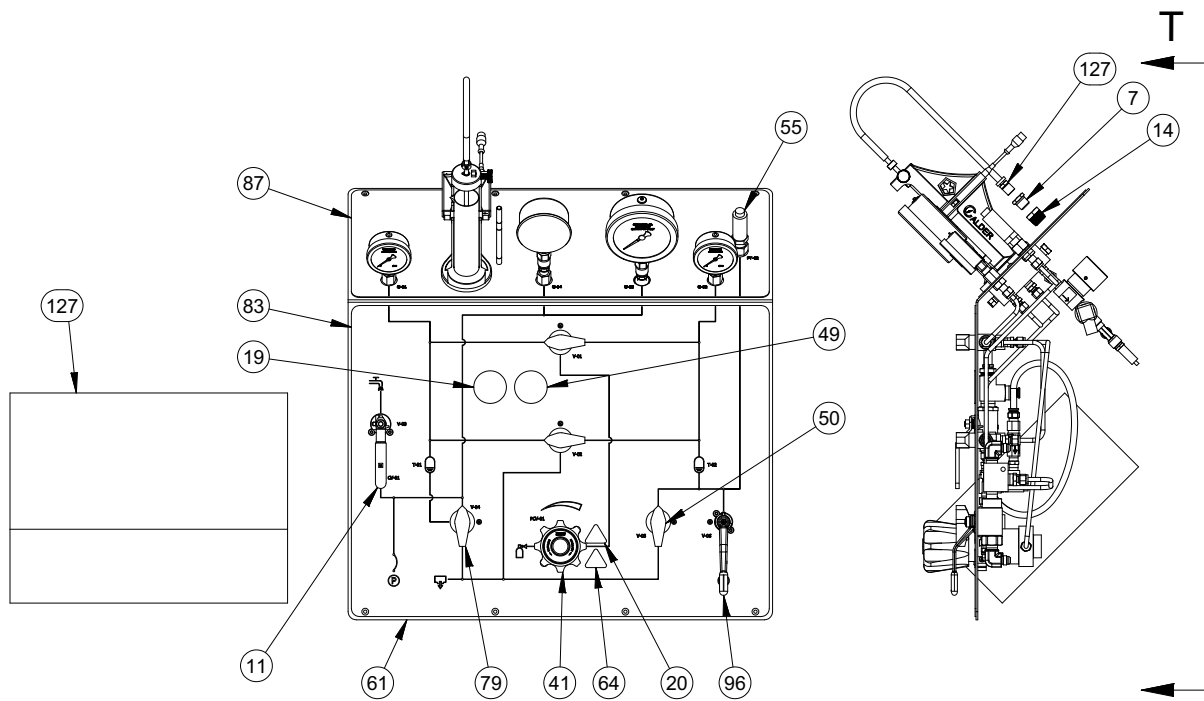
DIGITAL LEAKAGE MEASUREMENT SENSOR ASSEMBLY (P/N 98873) - - - - -35
